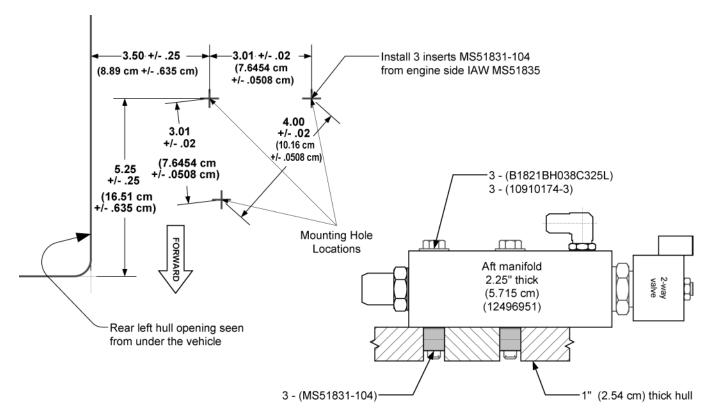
Mounting and Installation of Aft Manifold on 1" (2.54 cm) Thick Hull
